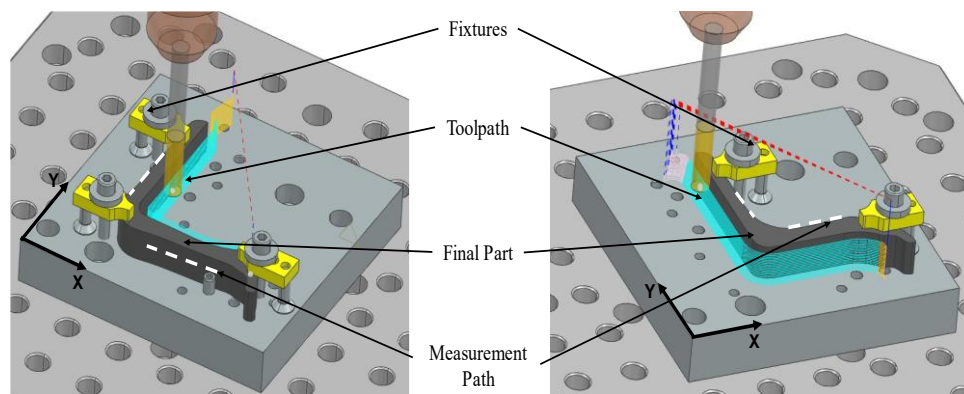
NX CAD/CAM fixture and milling strategy for testing/validation purposes; left: series 1 and 2, right: series 3
